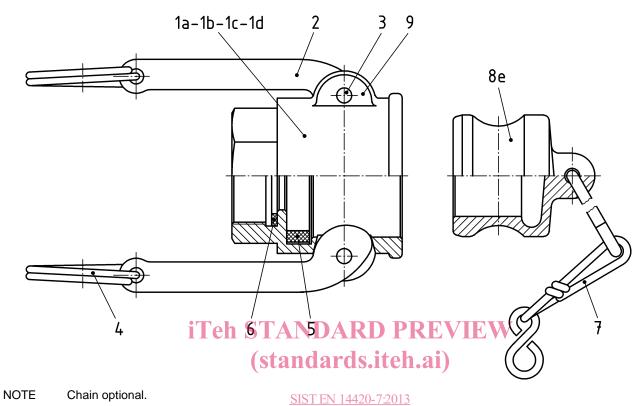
Coupler type DF and adapter type DF (dust plug)d-
